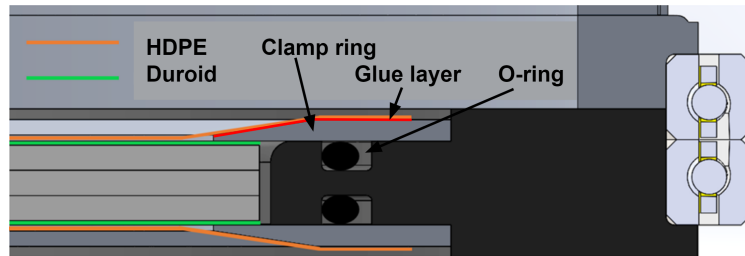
Cross-section of the PB-2a WHWP, showing the vacuum AR coating design. An additional volume to extend the vacuum life (not shown) is mounted to the bottom of the rotating section (dark grey).
